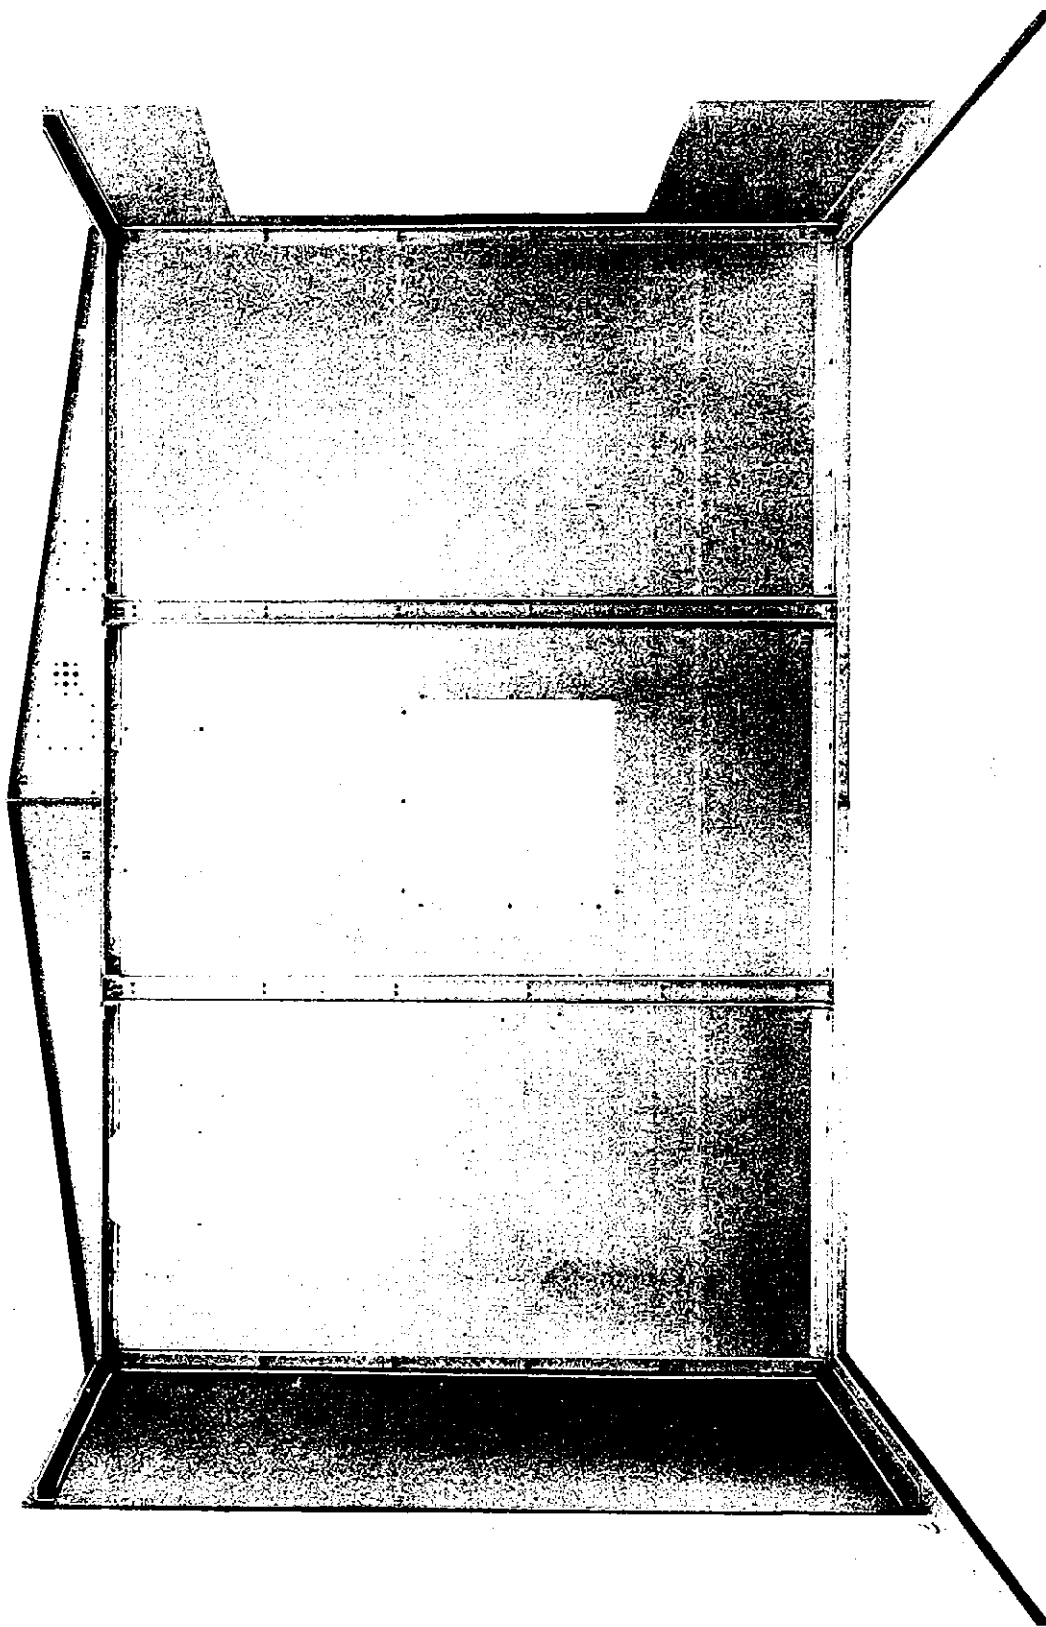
Enclosure, Starting End Assembly with Roof Truss
